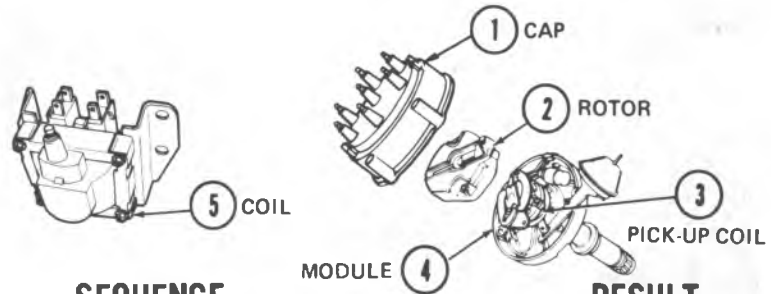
Exploded View of 8 Cylinder HEI Distributor
